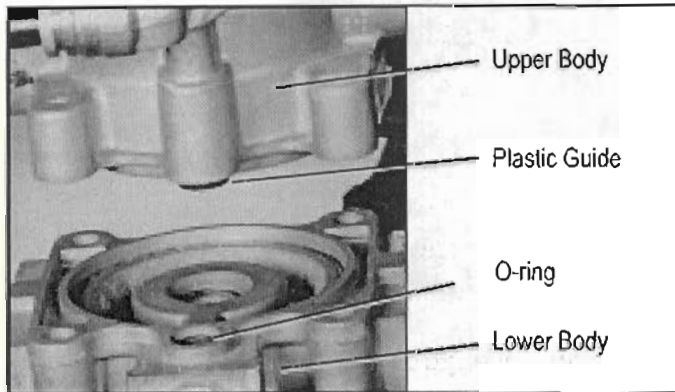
PLASTIC GUIDE AND O-RING SEAL
